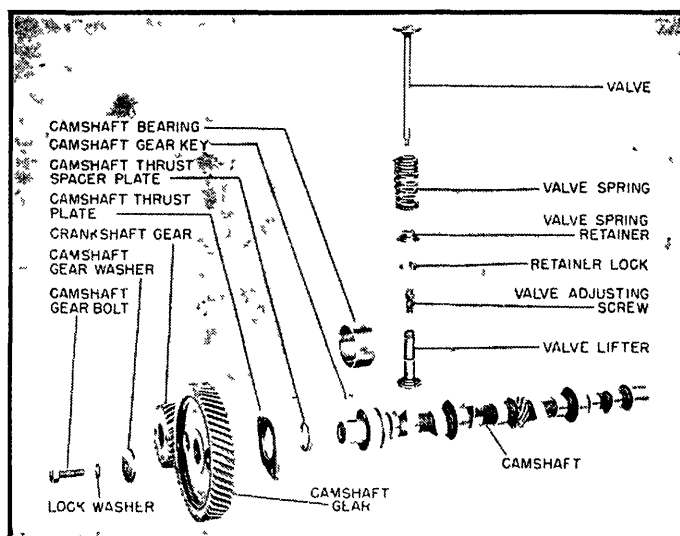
Lay out of camshaft, gears and valves in 1951-52 four-cylinder engine. Six is similar
